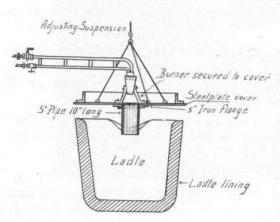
Hauck ladle heating burner for heating large ladles. Operates with compressed air in connection with any grade of kerosene, fuel oil, or crude oil. The burner is furnished mounted on flange with bolt holes. It can be quickly bolted on to a sheet iron or cast iron cover which foundrymen generally construct themselves.
